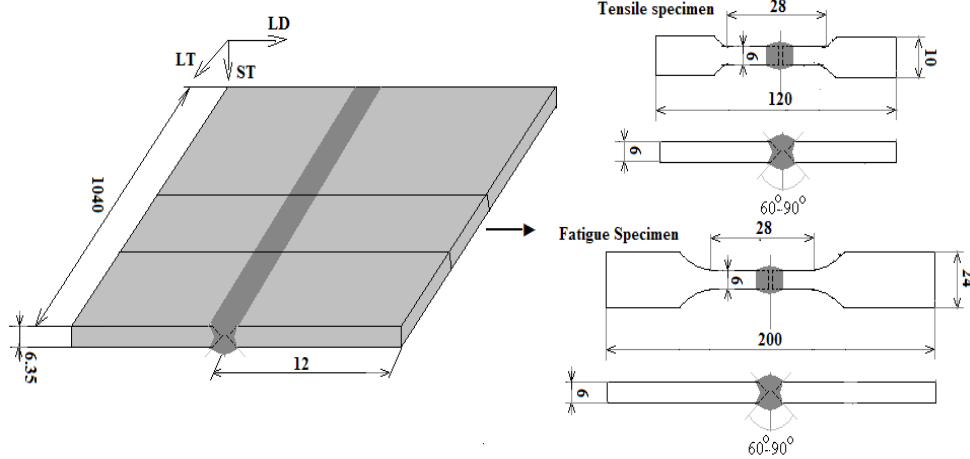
Dimensions of the tensile and fatigue specimens machined from the welded plates.
